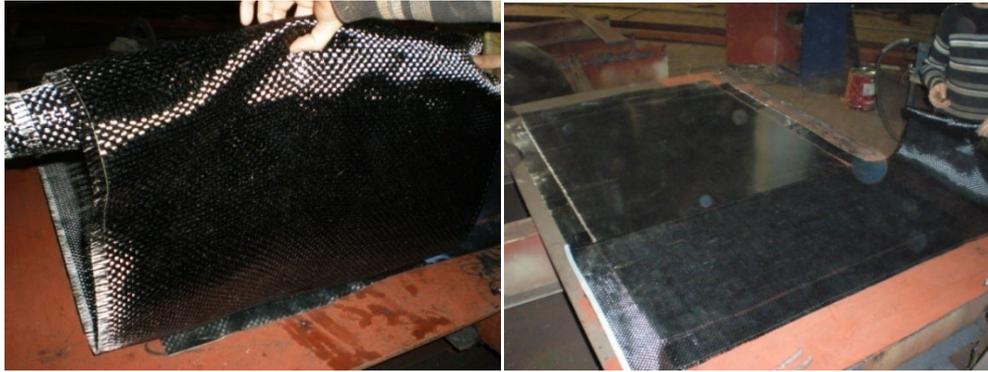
CFRP textile used in the CLB specimen and placing the fabric inside the double steel plates using epoxy
